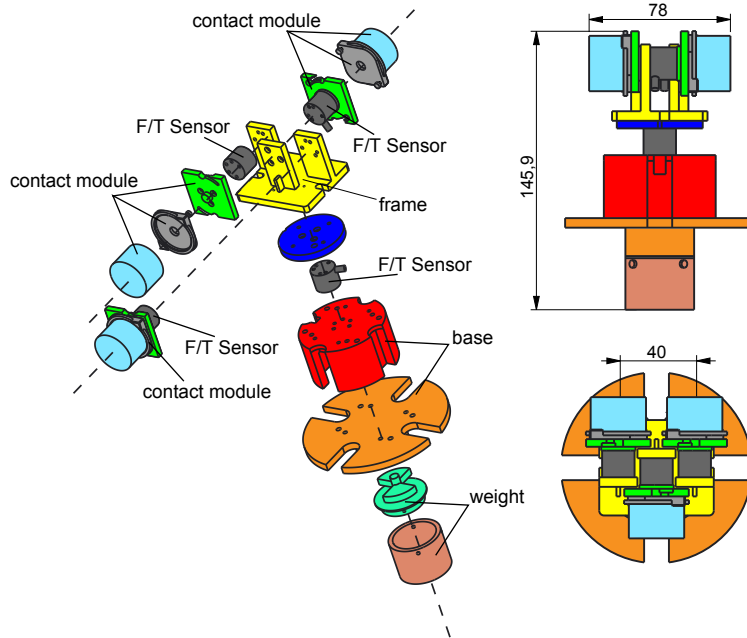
Exploded drawing view of the Tripod Device and its main features with dimensions in [mm]
